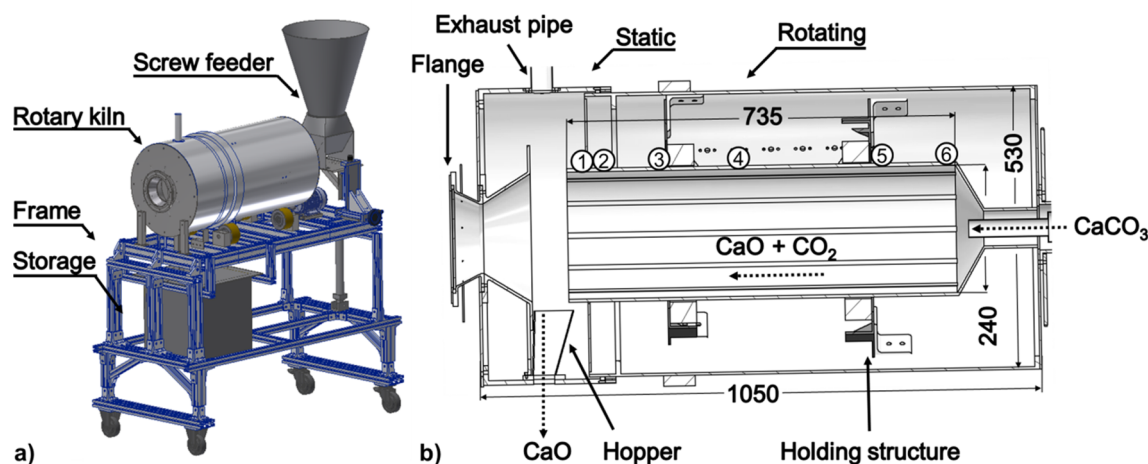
(a) CAD sketch of the whole system and (b) section view of the rotary kiln indicating the components and the positions of the thermocouples (1–6). The dimensions are given in mm.
